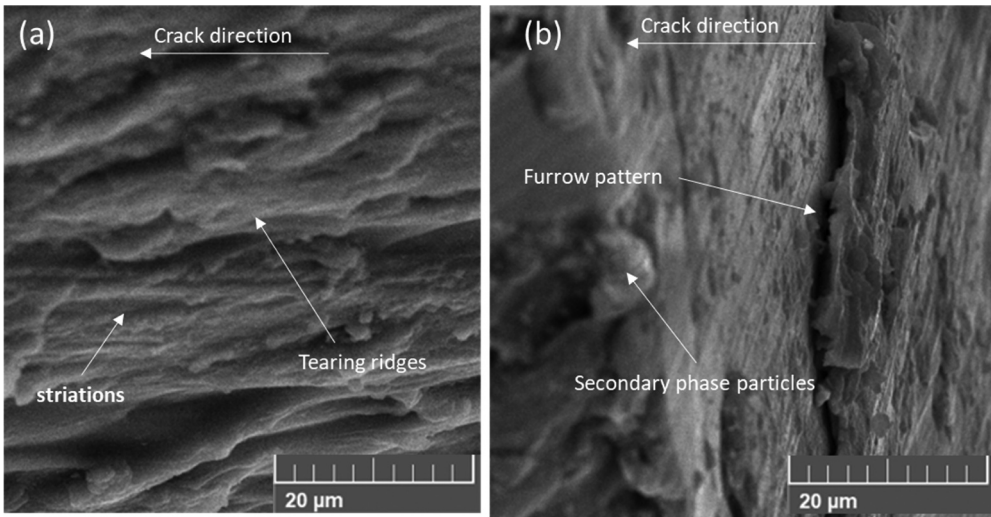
Final fatigue fracture morphology of Al alloy 7075-T7, (a) countersunk rivet hole, (b) perpendicular rivet hole.
